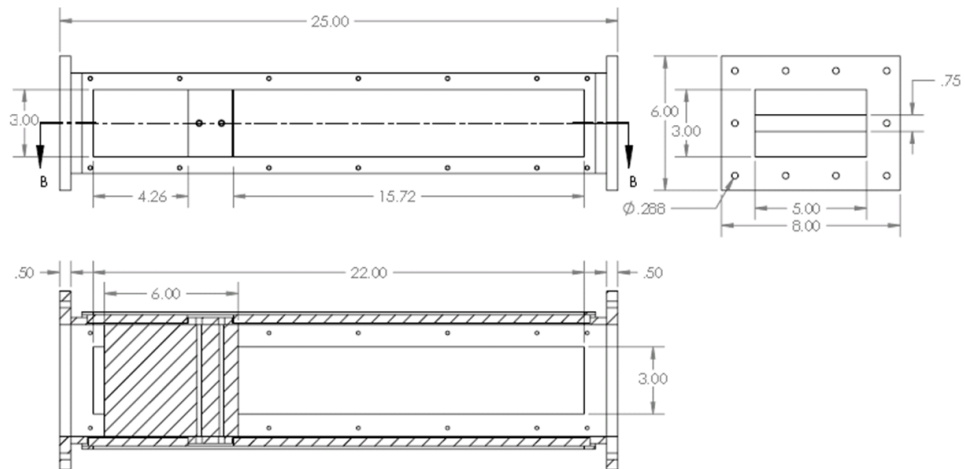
Schematic of the test section with ballistic bluff body installed, dimensions in inches
